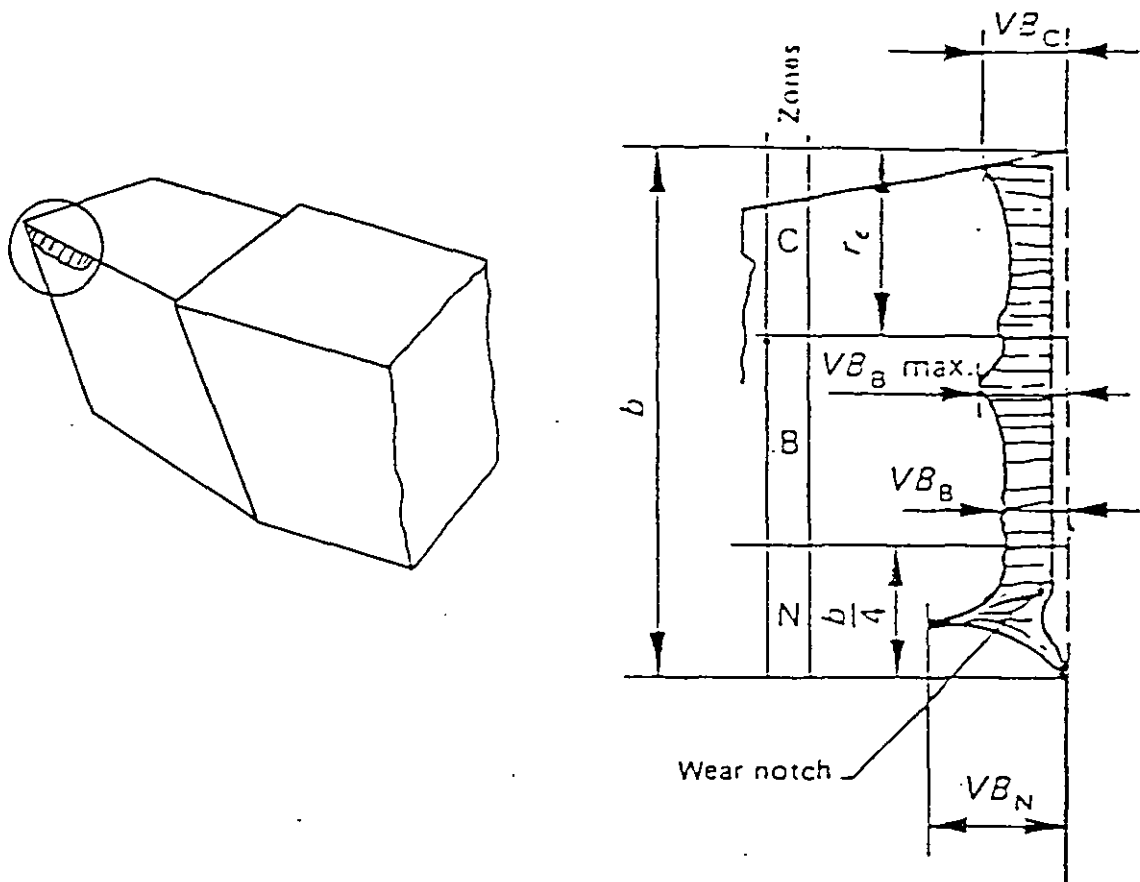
FLANK WEAR ON A SINGLE-POINT TOOL (TURNING)
